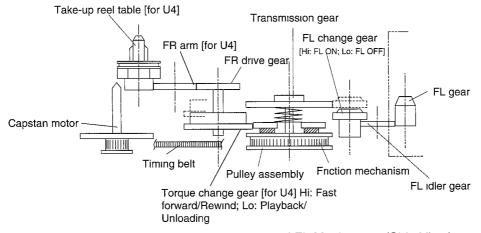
Mechanism that Drives Reel Tables and FL Mechanism (Side View)
